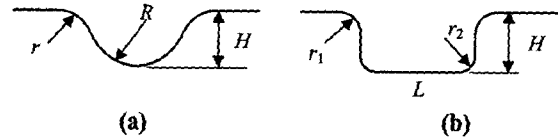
Geometric shapes of drawbeads in the front side member: (a) circular drawbead; (b) rectangular drawbead
